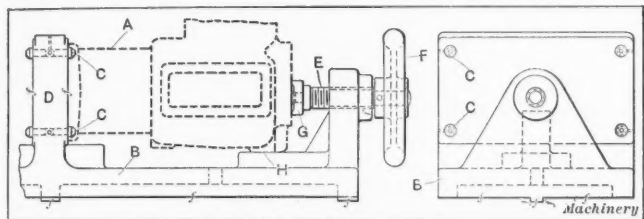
Detail of Reciprocal Milling Jig shown in Fig. 6
